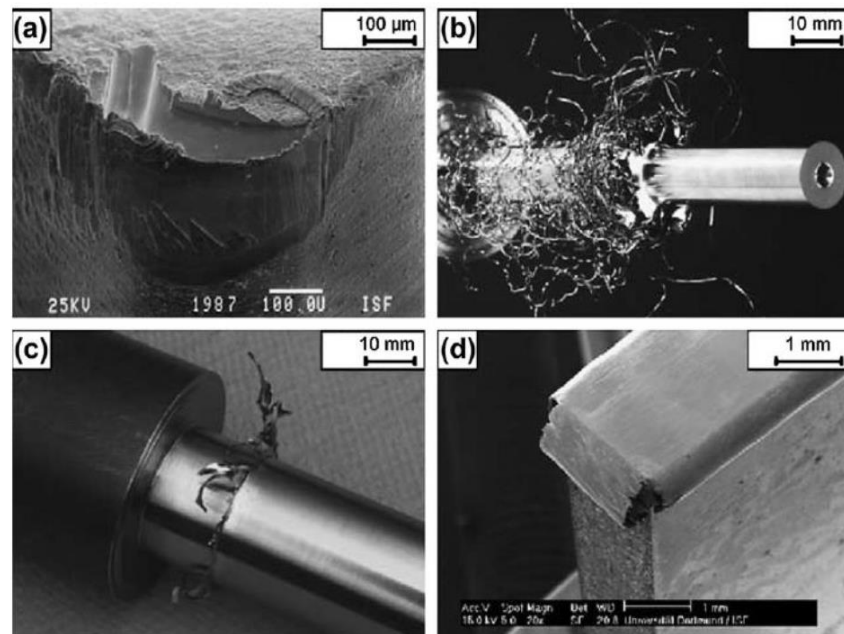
Major drawbacks in machining NiTi shape memory alloys: (a) high tool wear; (b) undesirable chip formation; (c) formation of burrs after turning (d) and grinding [33]
